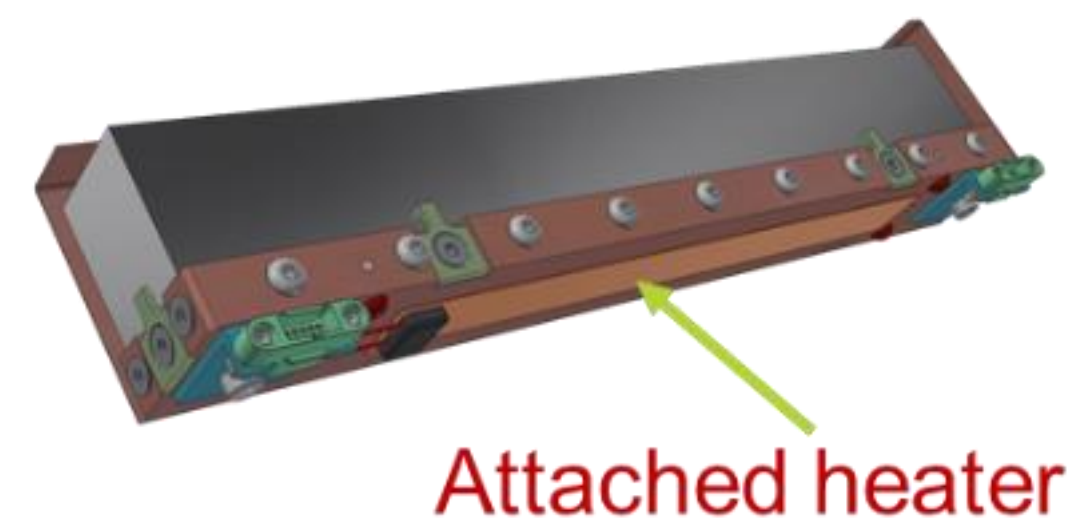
Crystal housing assembly showing the heater and sensor attachment to the D-crystal.
